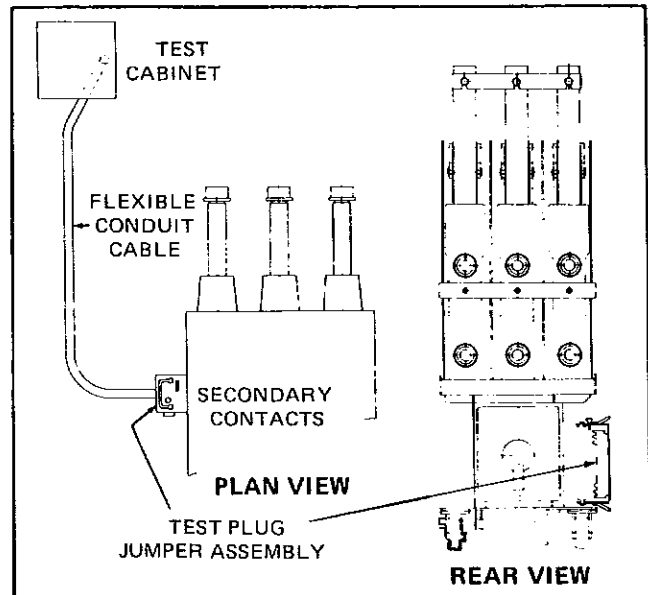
Connecting Breaker Secondary to Test Control Cabinet
